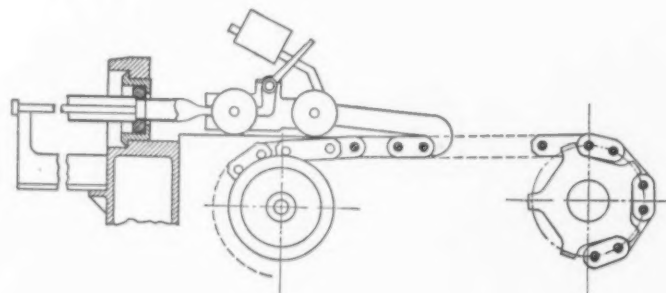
Chain mechanism and clutch or grip which do the pulling of the tube through the die.
